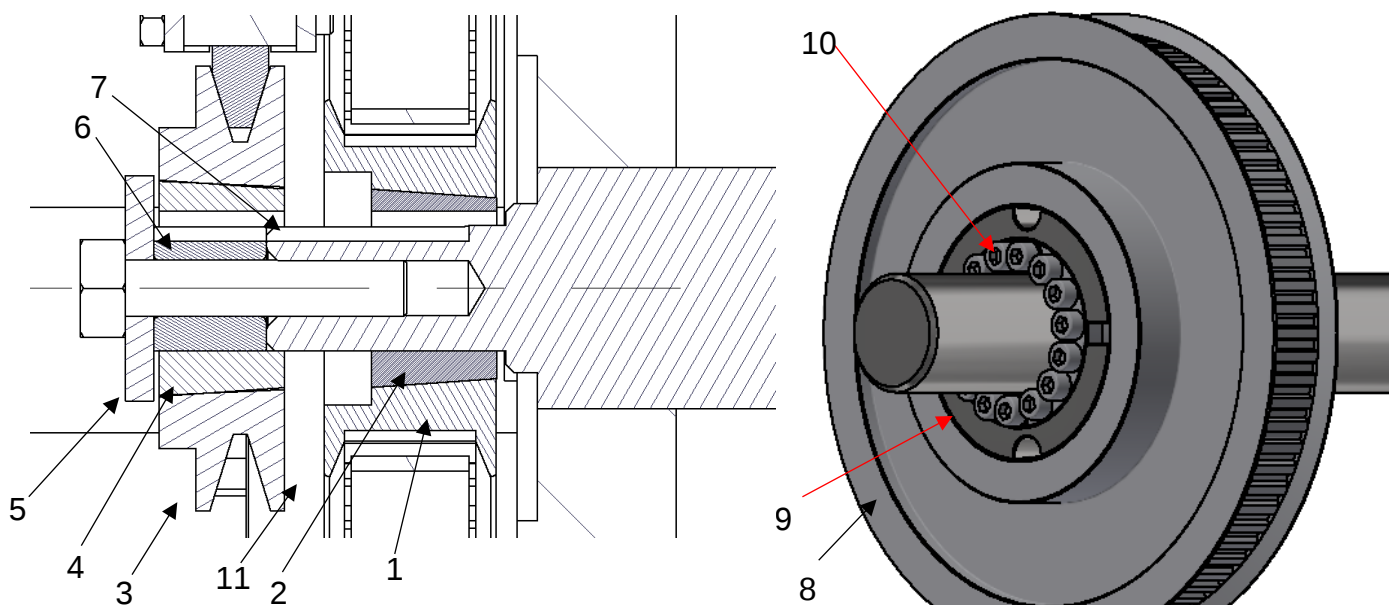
Cross section of the small sprocket assembly and design view of the big sprocket
